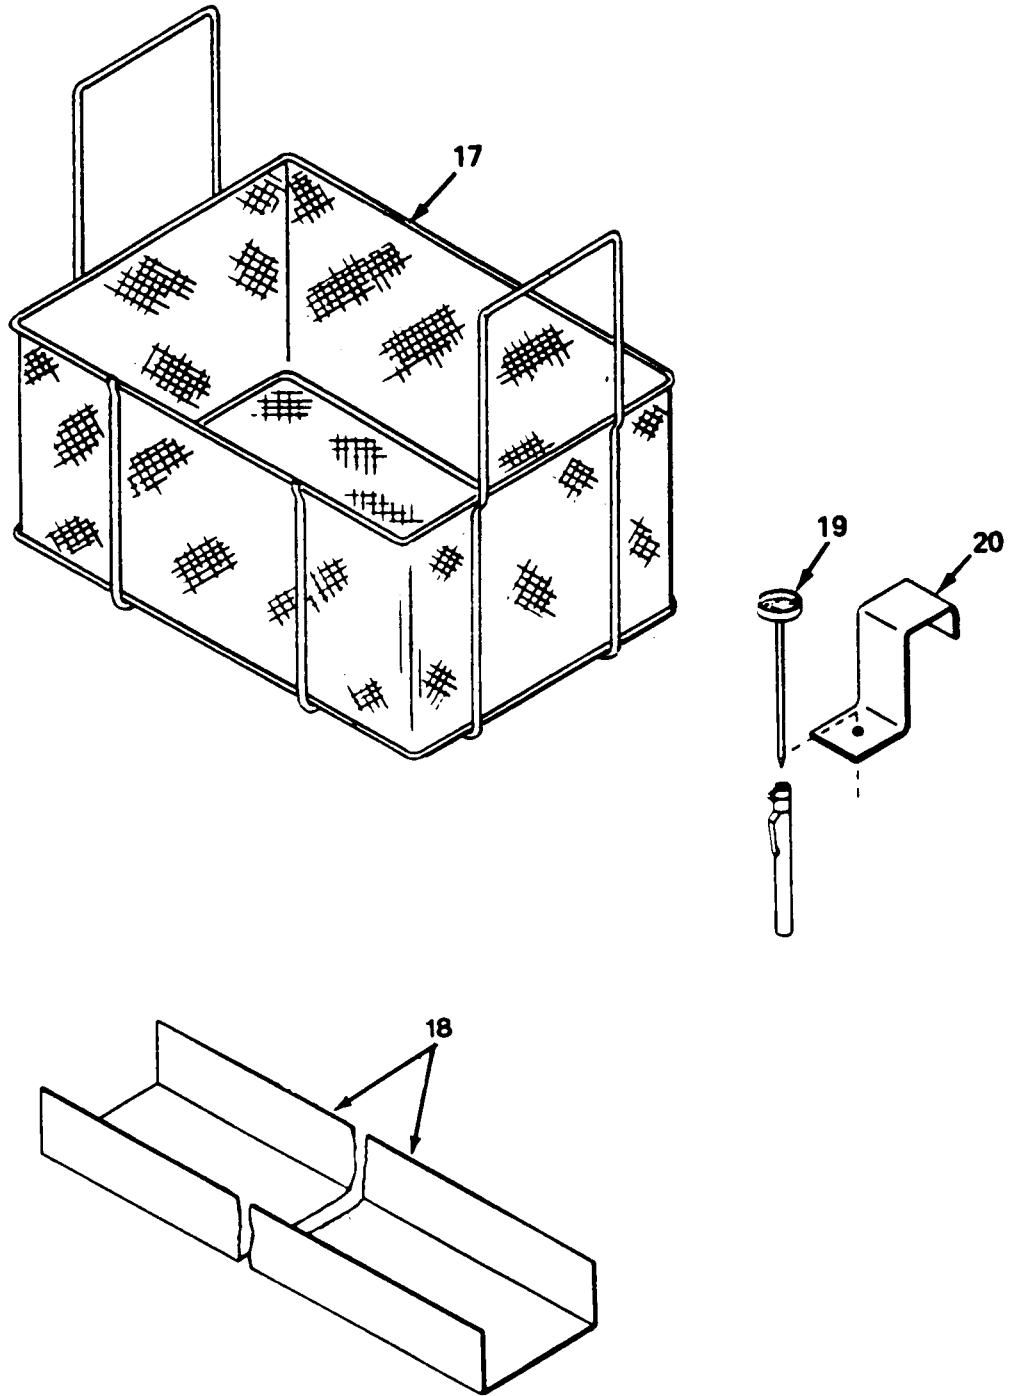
Drain Hose Assemblies, Immersion Sink Rack, Sink Adapter and Thermometer (Sheet 2 of 2).
